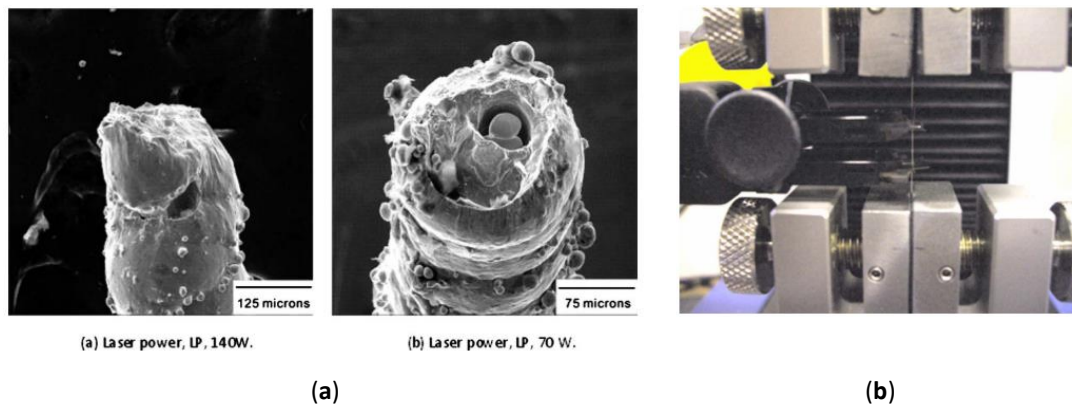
(a) SEM micrographs of failure surfaces of 316L struts; (b) tensile mechanical testing of wire [14]
